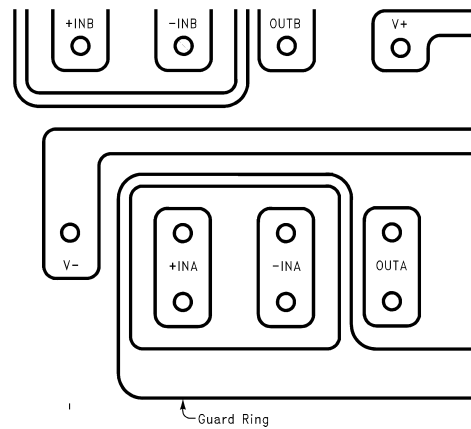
Example, using the LMC6036 of Guard Ring in P.C. Board Layout
